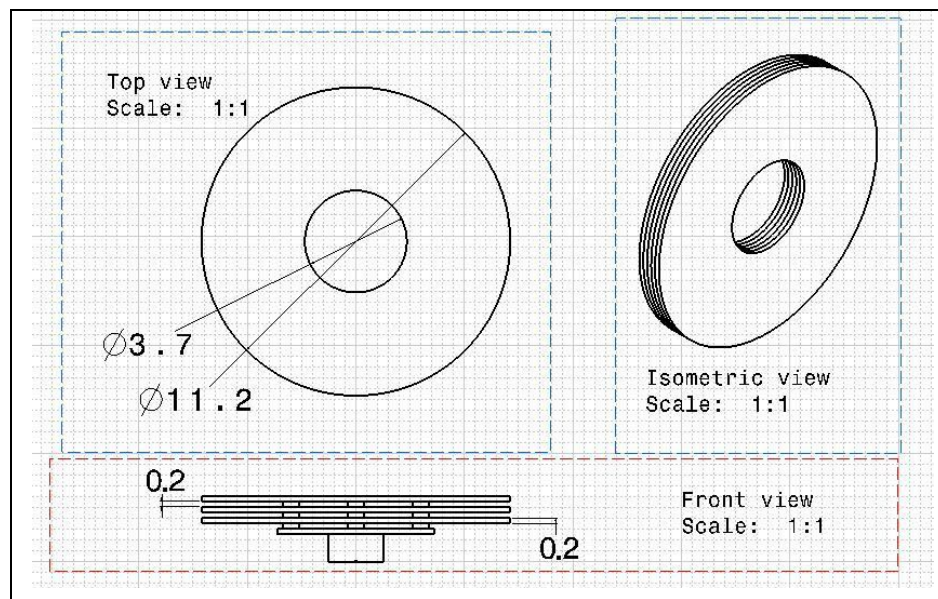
Three Discs Impeller Design with 0.2inch Spacing
